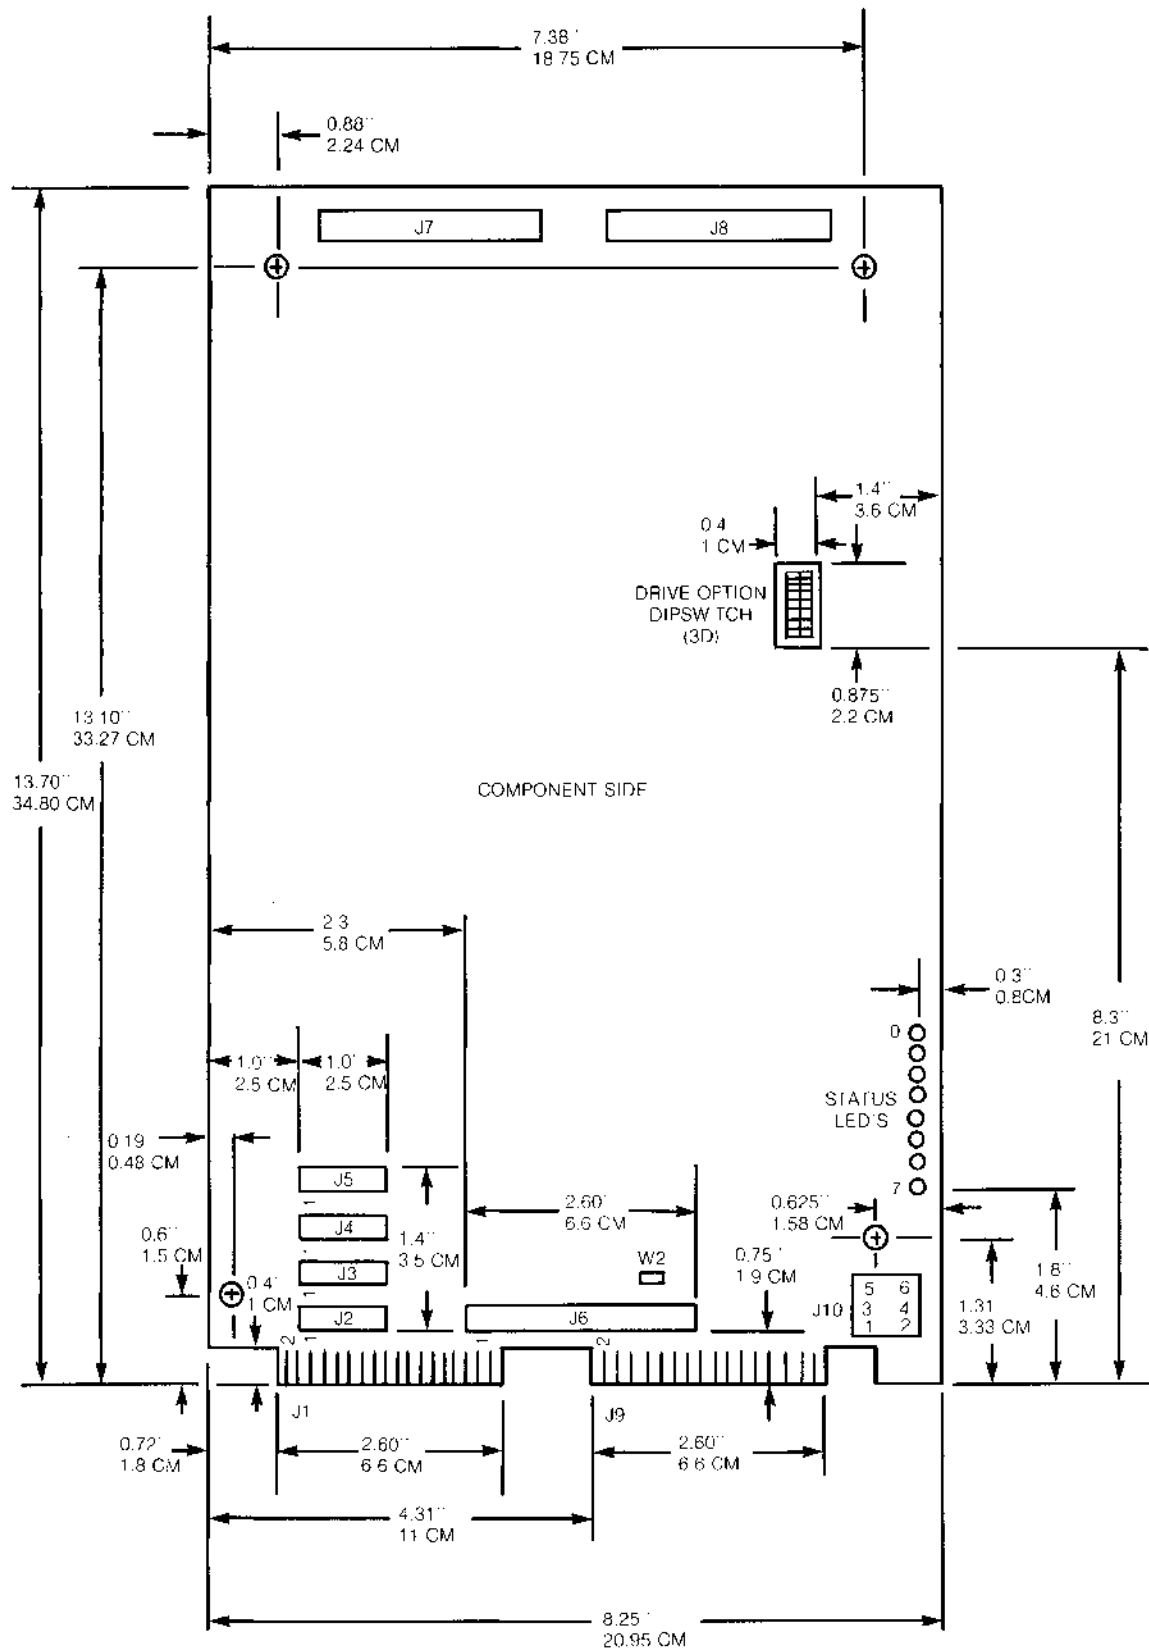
SA1404D DIMENSIONAL DRAWING
